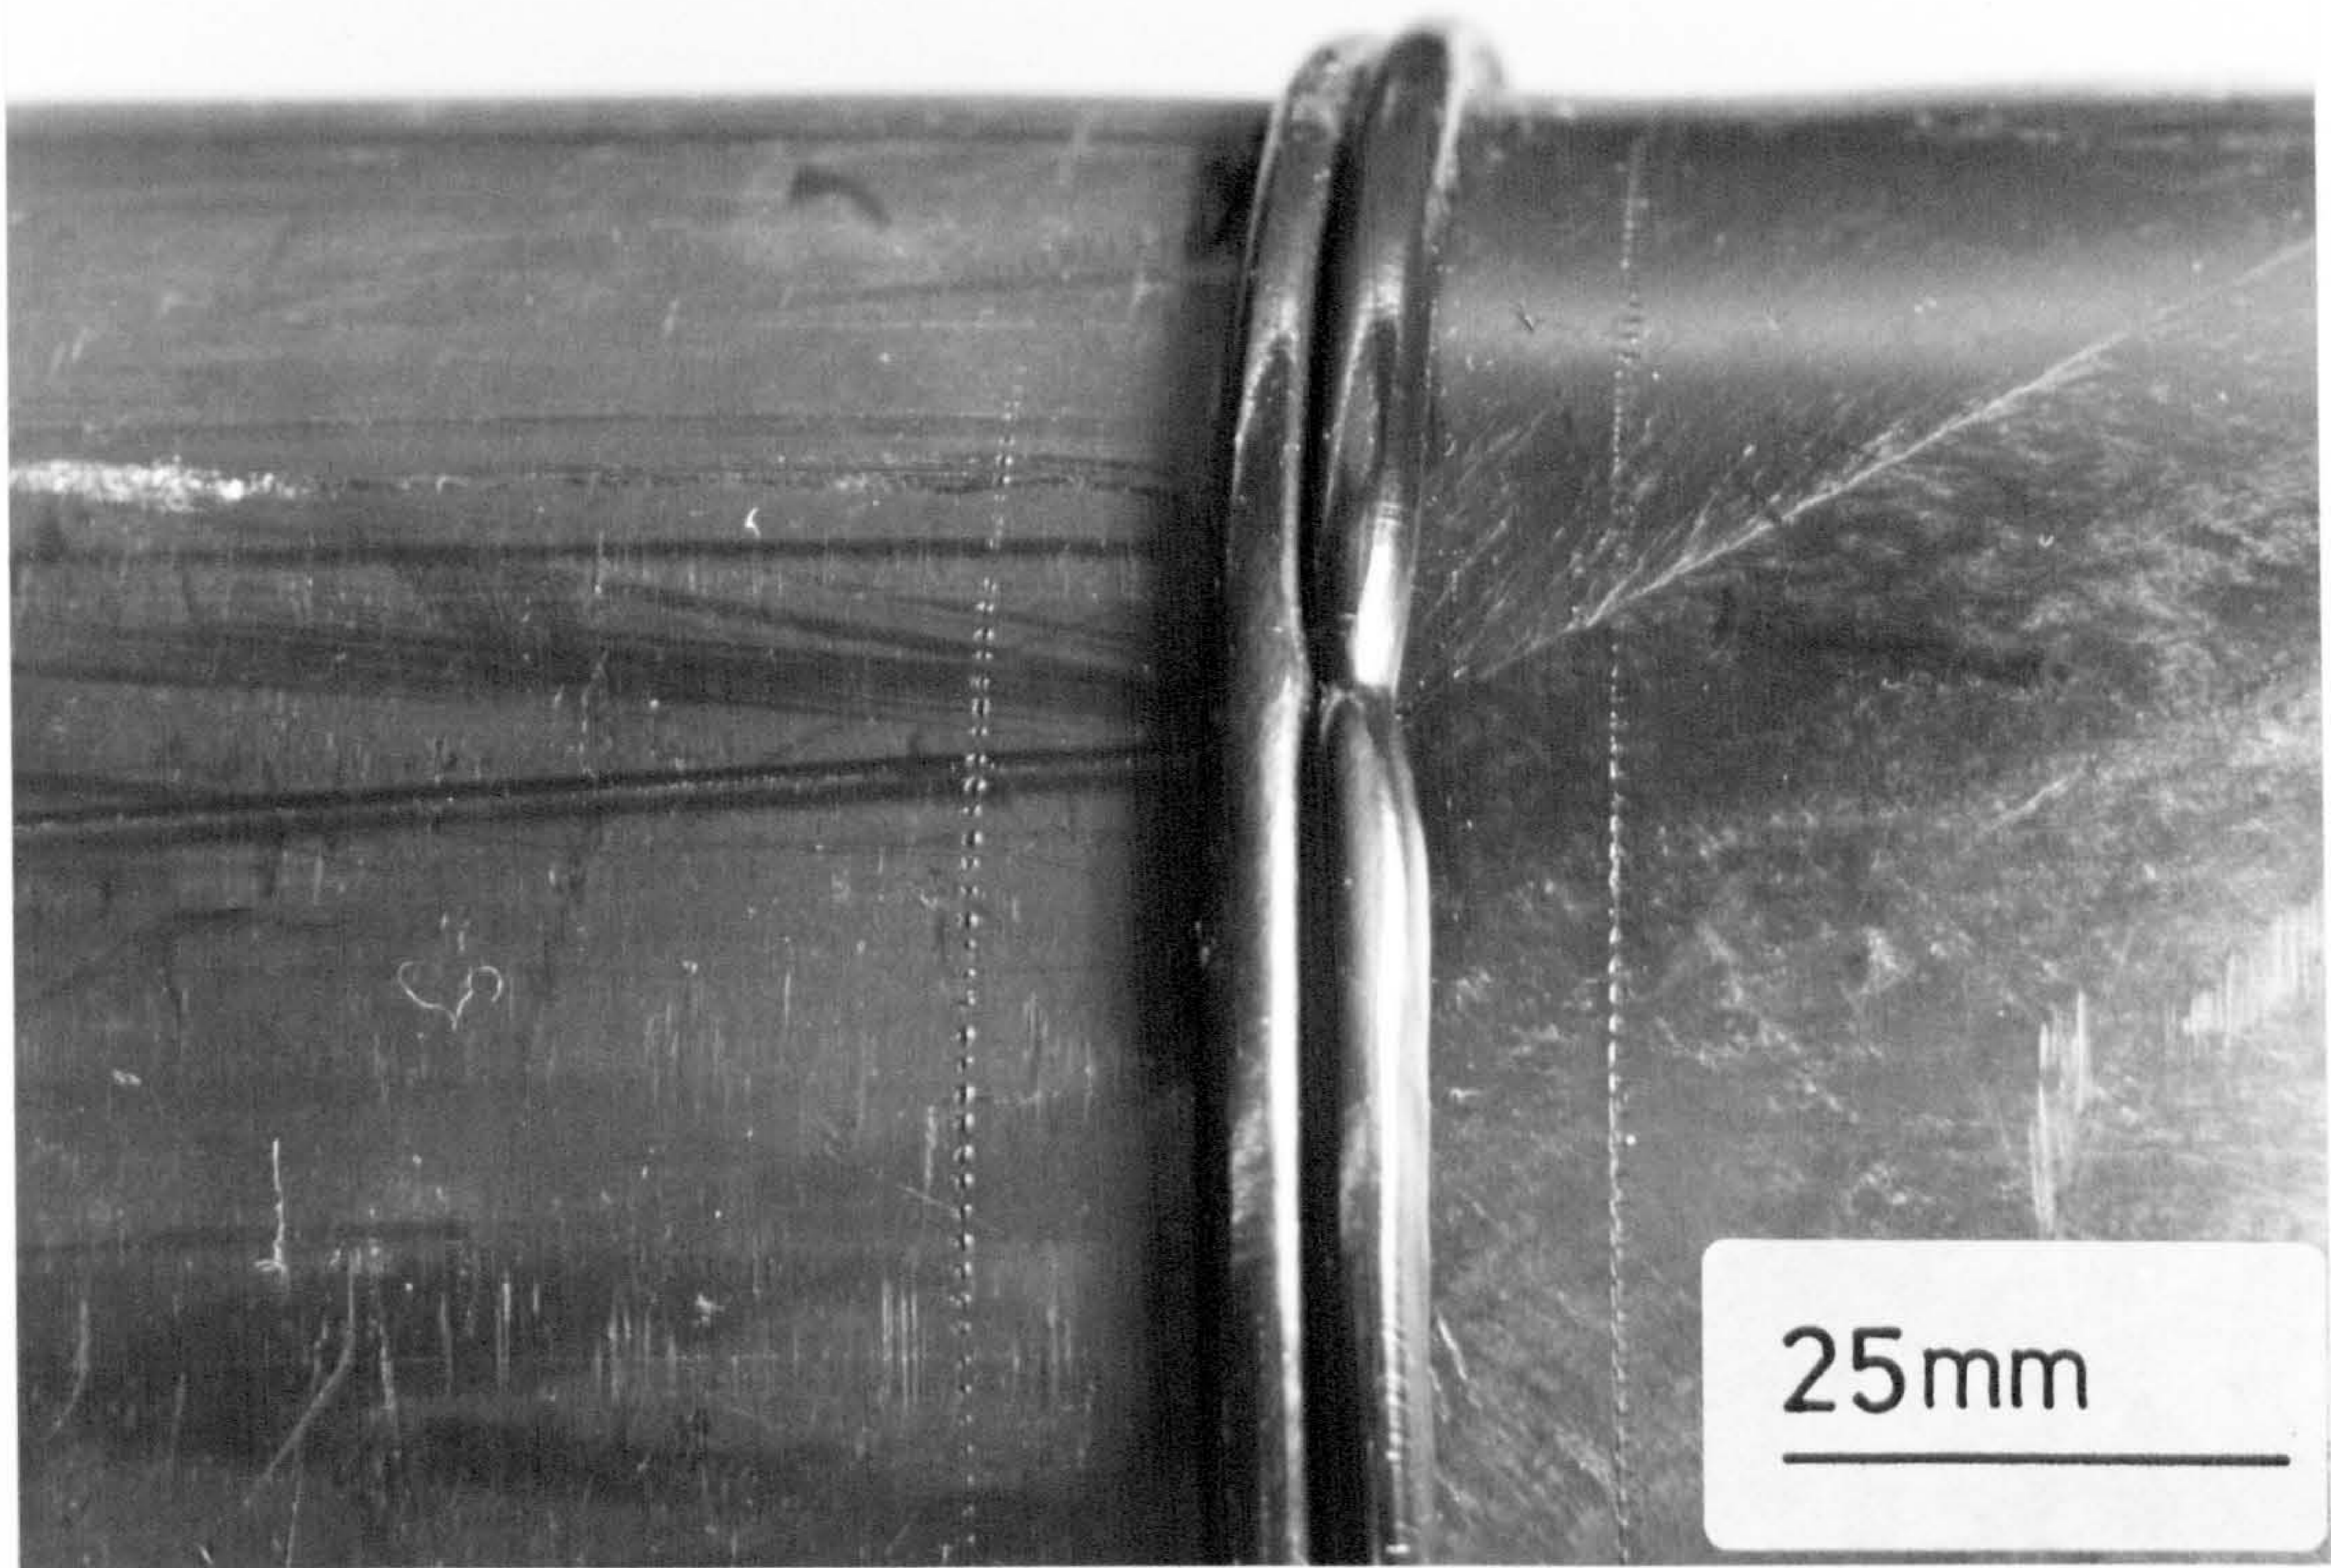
Weld bead discontinuity between an injection moulded bend and extruded pipe. An internal weld line in the fitting is also shown to good effect.
